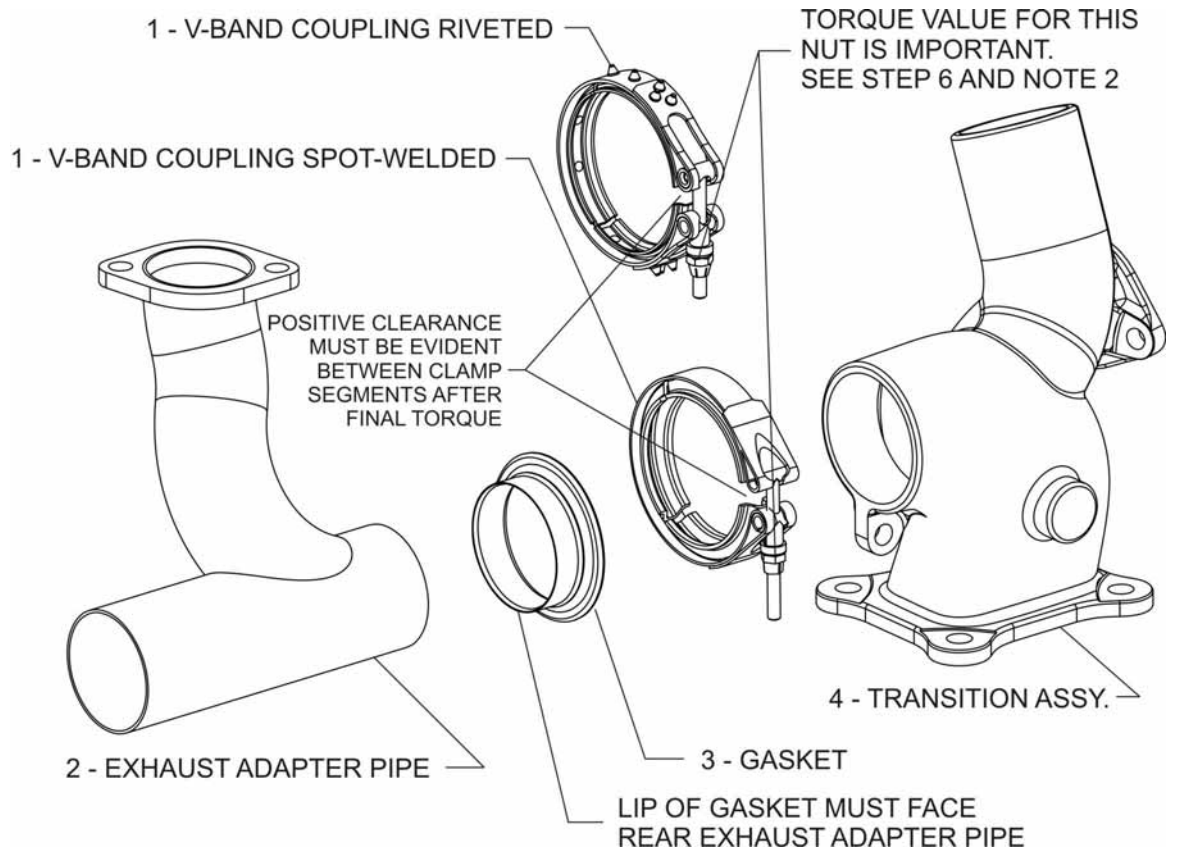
Illustrative Example of Exhaust Manifold Gasket and V-Band Coupling Assembly
